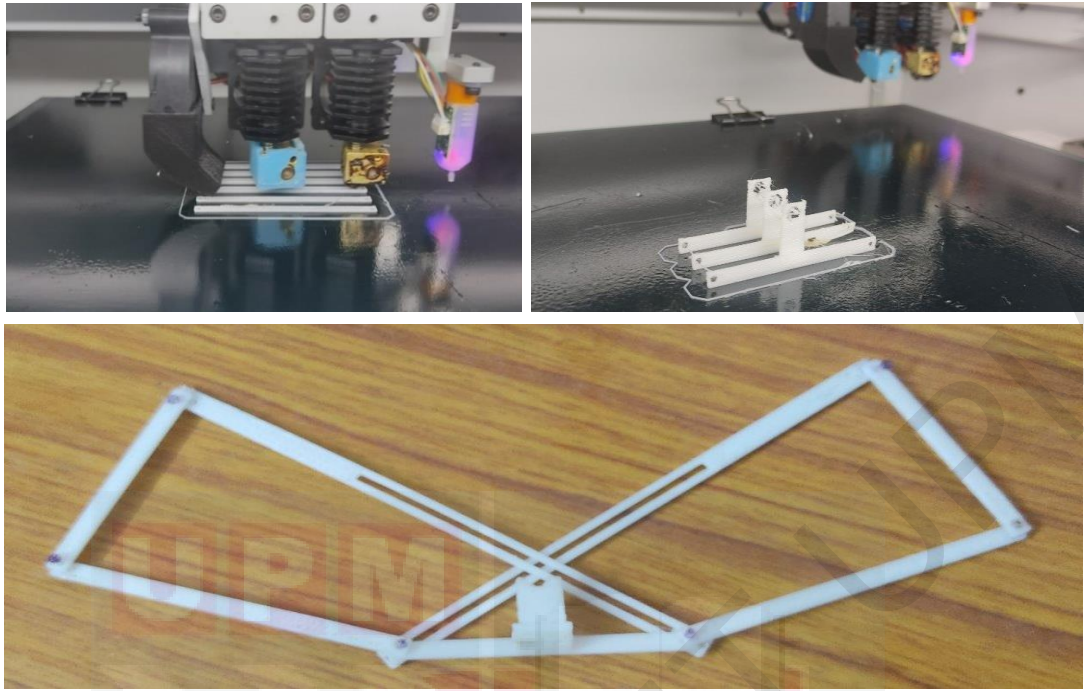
3D Printed Design of X-Pattern Four-Bar Mechanism
